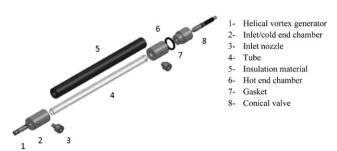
An exploded view of vortex tube tested. 1. Helical vortex generator; 2. Inlet/cold end chamber; 3. Inlet nozzle; 4. Tube; 5. Insulation material; 6. Hot end chamber; 7. Gasket; 8. Conical valve.
